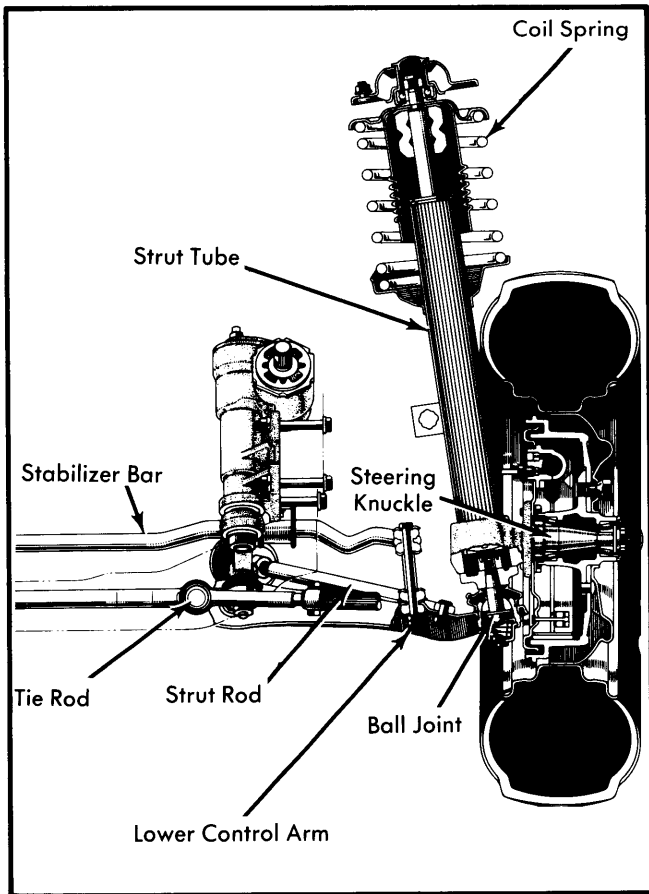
Assembled View of Front Suspension Assembly (Corolla Shown; Other Models Similar)
